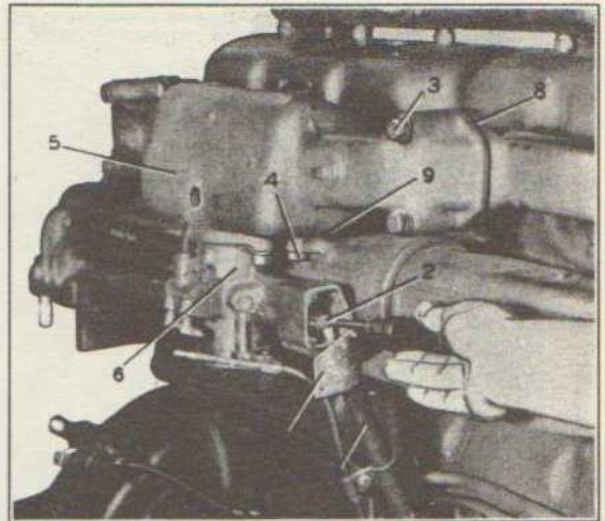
View of Control Arrangement at Governor Throttle Housing
